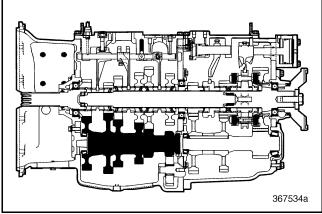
Front Countershaft Component Locator (T313L/T318L Shown)
